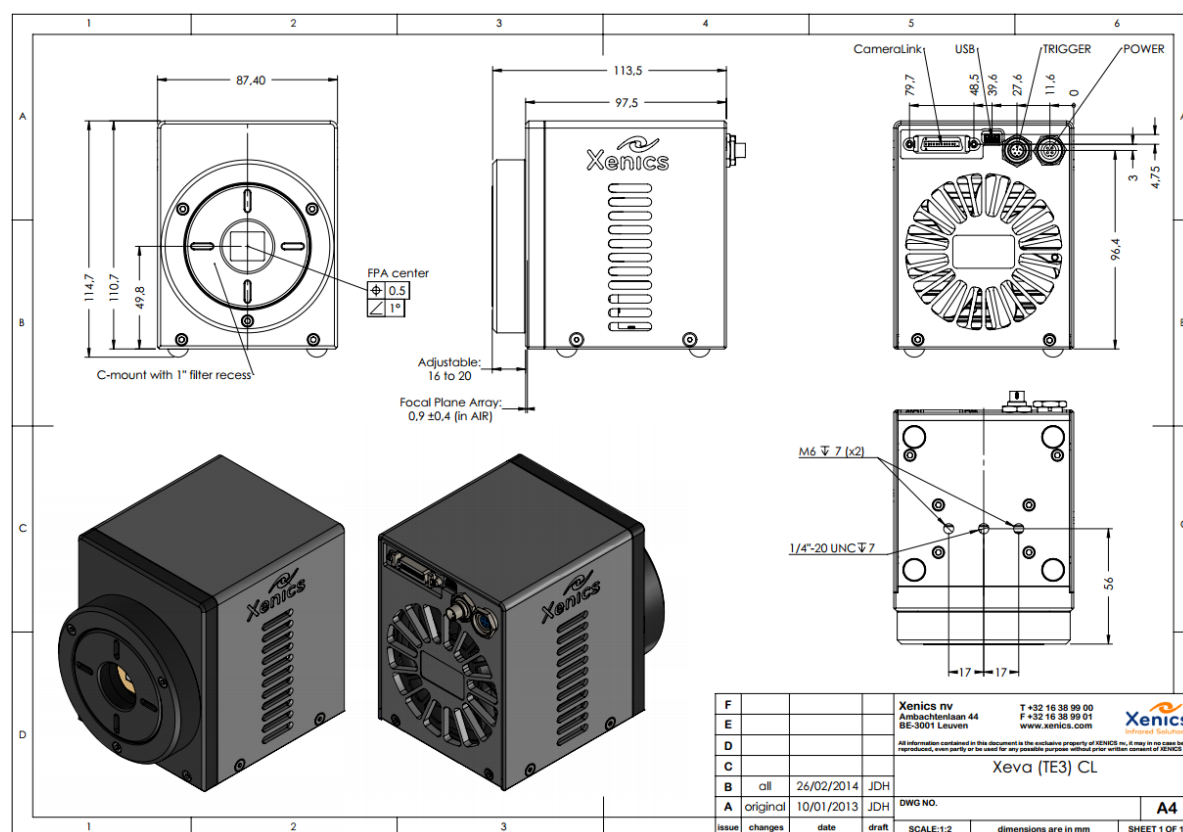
Mechanical drawing Xeva InGaAs 640 CL TE3
